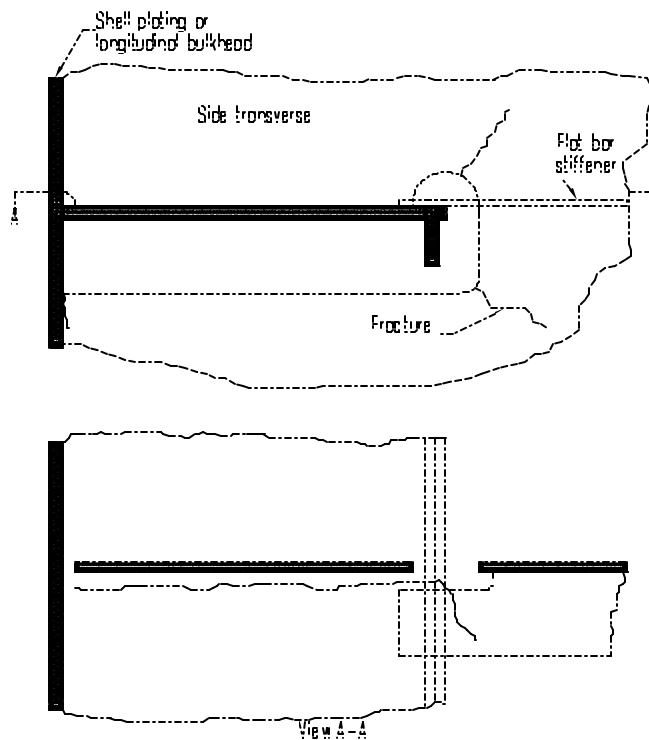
Web and flat bar fractures at cut-outs for longitudinal stiffener connections.
